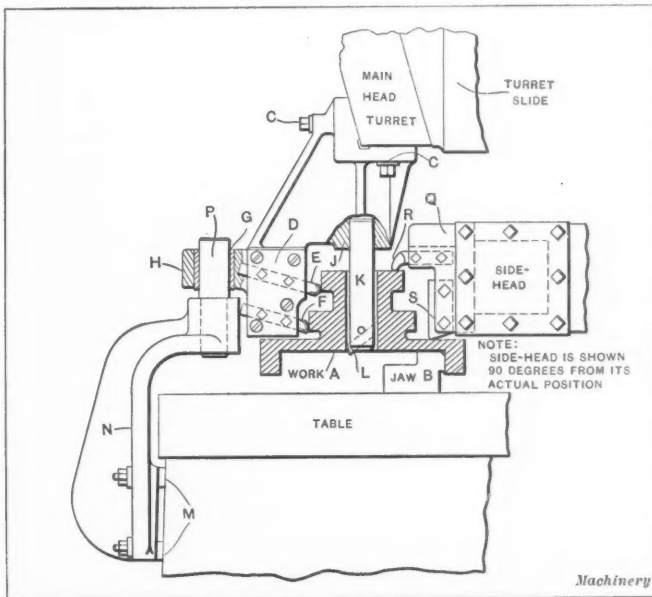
Piloted Multiple Turning Tool for Triple Gear Blank
